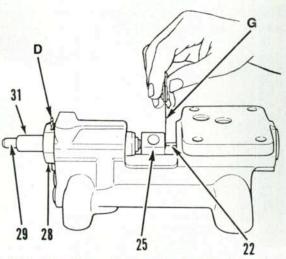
Checking adjustment of valve keeper (25). Insert a 1/8 inch (3 mm) drill (D) or rod through valve spool (29) and bushing (28) to lock control valve in neutral position. Use a feeler gage (G) to measure clearance between keeper and actuator rod (22). Refer to text.
